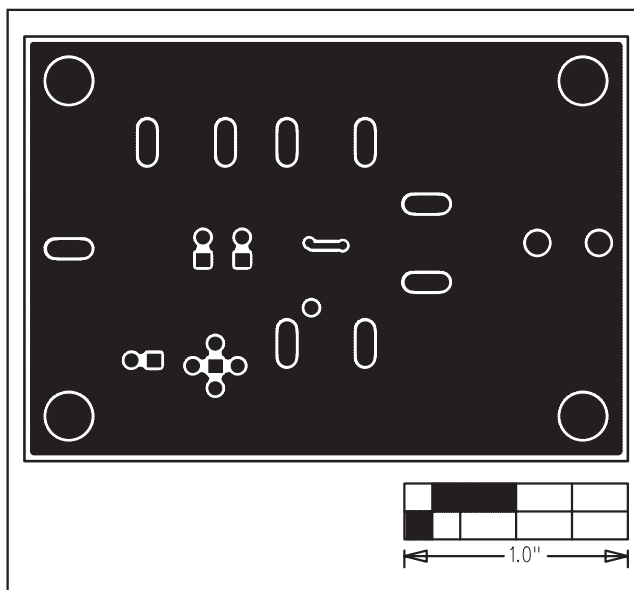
MAX14504 EV Kit PCB Layout—Solder Side
